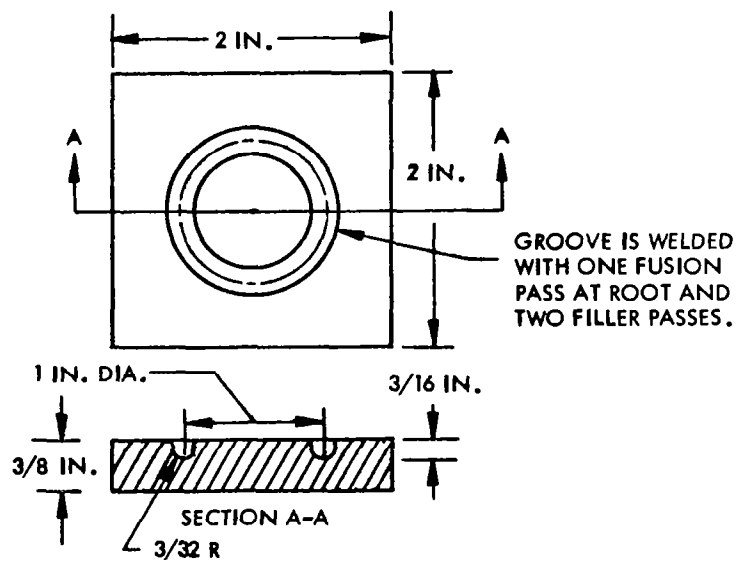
Sheet and Plate Weld Restraint Specimens
